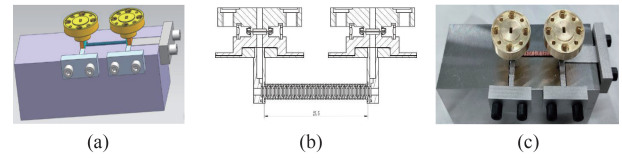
(a) Clamping molds and the final test sample, (b) assembly drawing using UG software, and (c) assembly for testing
